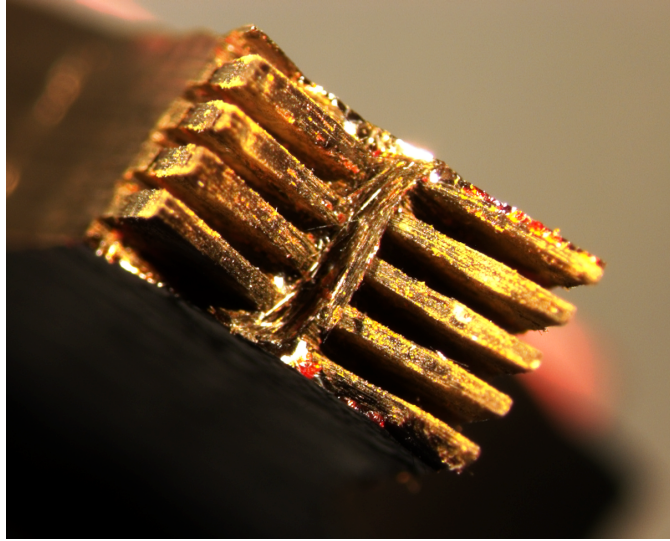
Optical micrograph of the fracture surface of specimen T4-6.
